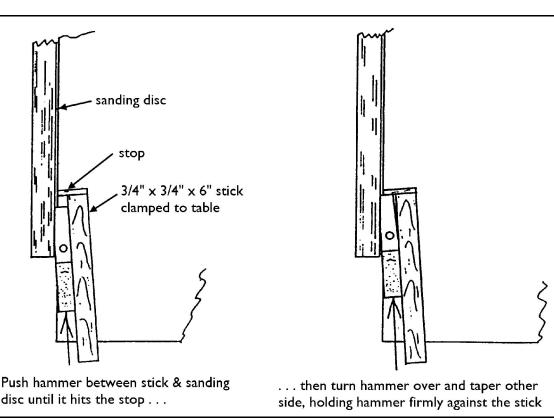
The Spurlock Specialty Tools hammer tail arcing jig
